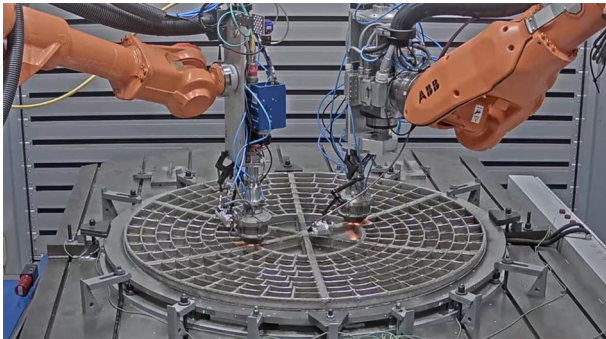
Example of 1.5 m mirror support being manufactured as technology demonstrator (image courtesy of Fraunhofer and European Space Agency)[12].
